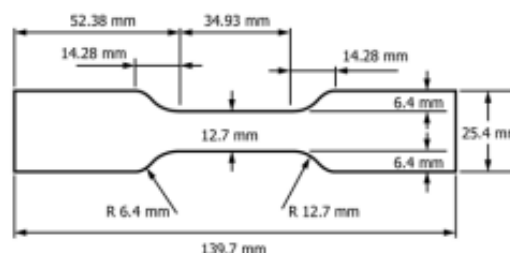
Die for Stamping Tensile Dumbbell Specimens—D3574 Die
